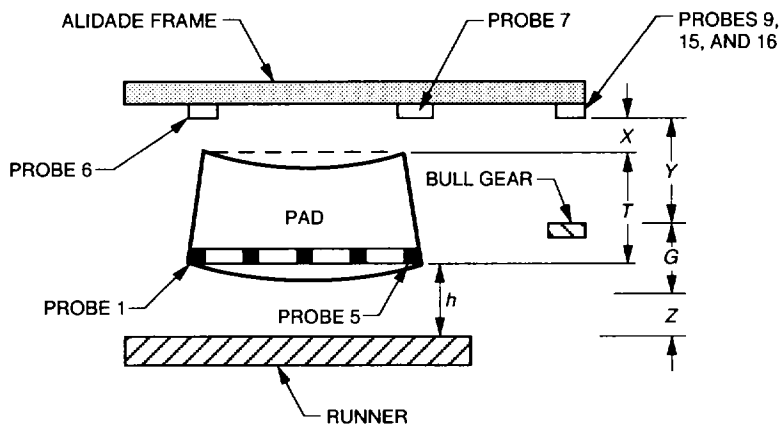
Hydrostatic bearing pad, runner, bull gear, and alidade frame viewed tangentially while facing toward the probe bar on pad 3. The probe bar is assumed not to deflect.
